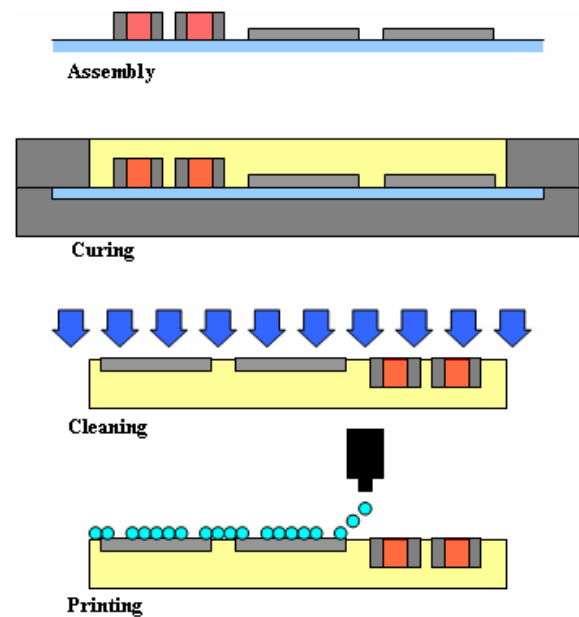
Process steps of inkjet printed System-in-Package manufacturing.
